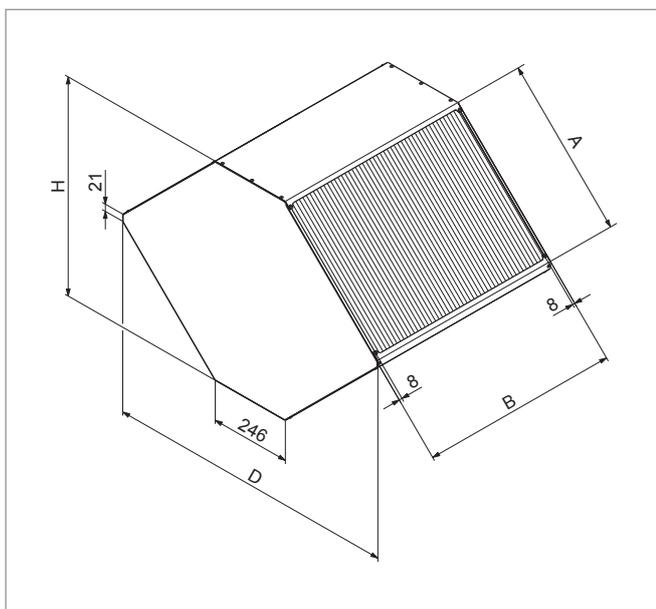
Dimension sheet for Gotthard plate heat exchanger of the construction type F (dimensions in mm)
